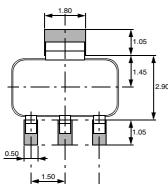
Recommended pad size SOT89B-1 Dimensions in mm
